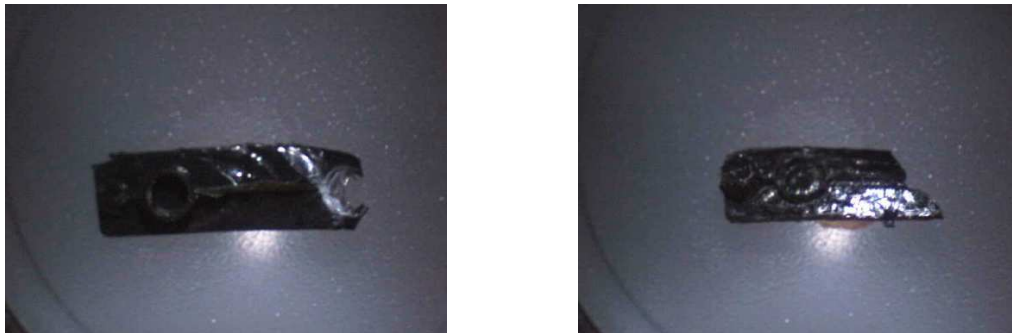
Damaged parts obtained from the BA03SLM moulding block
